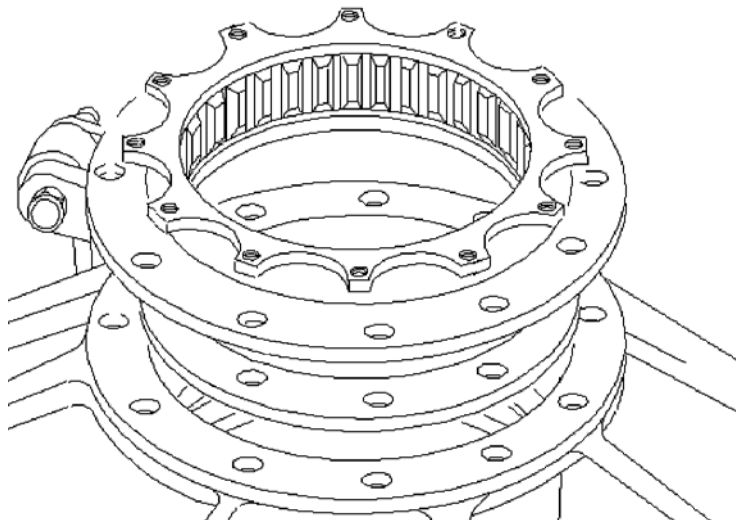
Main Rotor Drive Plate Assembly (AH-64A/D)
